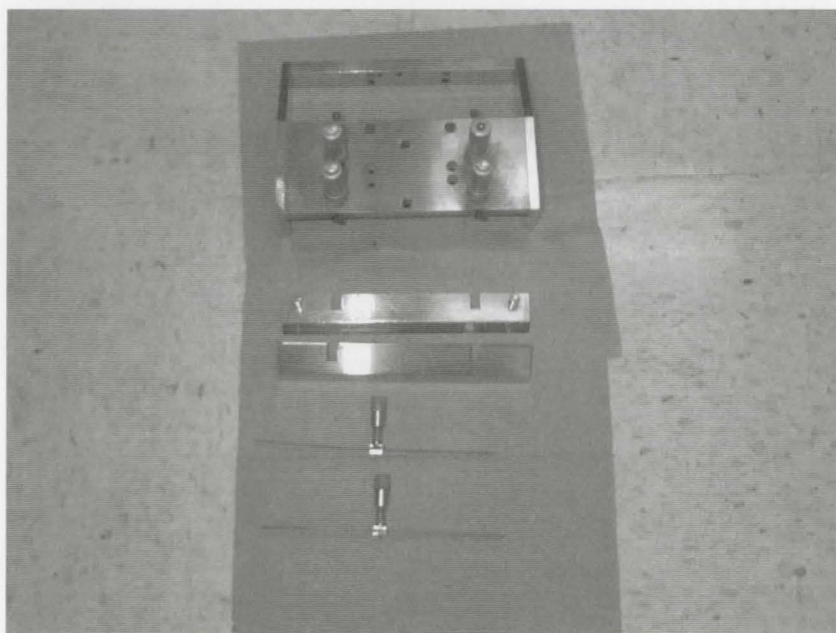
(a) Doctor blades with micrometer (expanded view)
